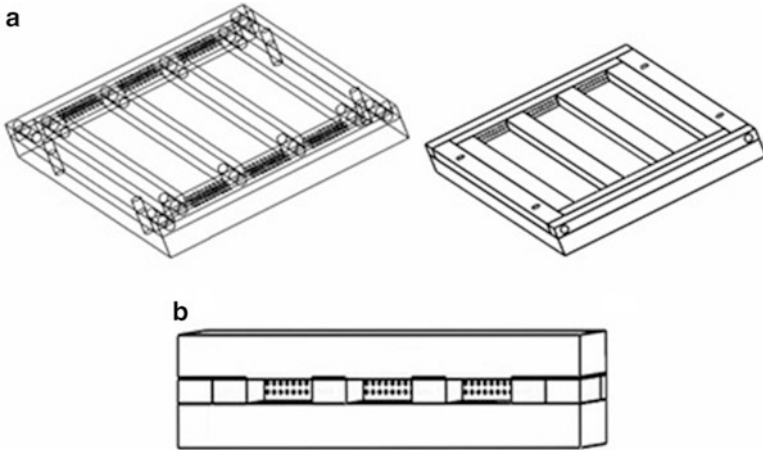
(a) An assembly of the mold showing the screws and mold enclosure (b) Cross-sectional view of the mold for the mechanical test samples
